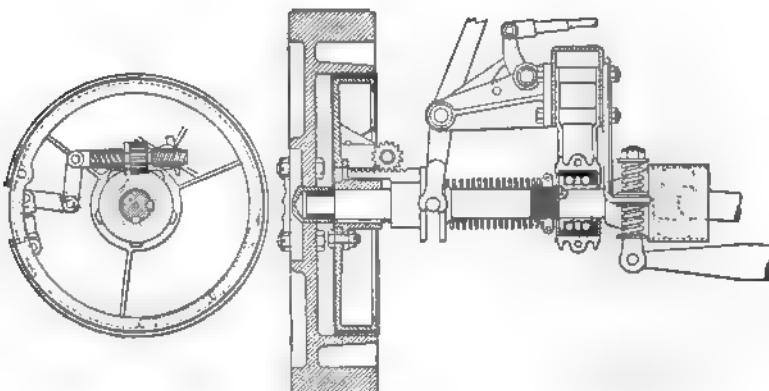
End View and Cross Section of the Packard Expanding Ring Clutch.
